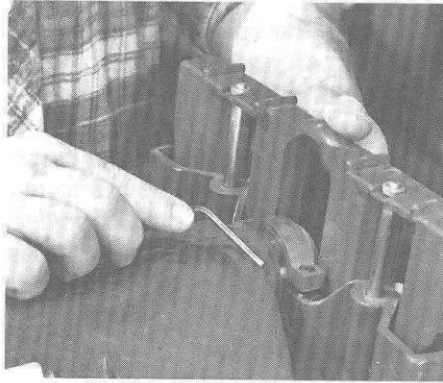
Place the lower saw guard on the quill, then tighten the Allen screws on either side of the saw guard collar.
